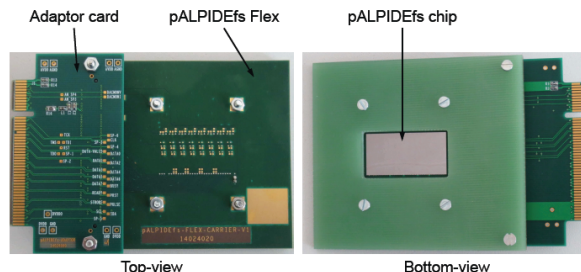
ALPIDE prototype flip-chip laser soldered on a flex.
